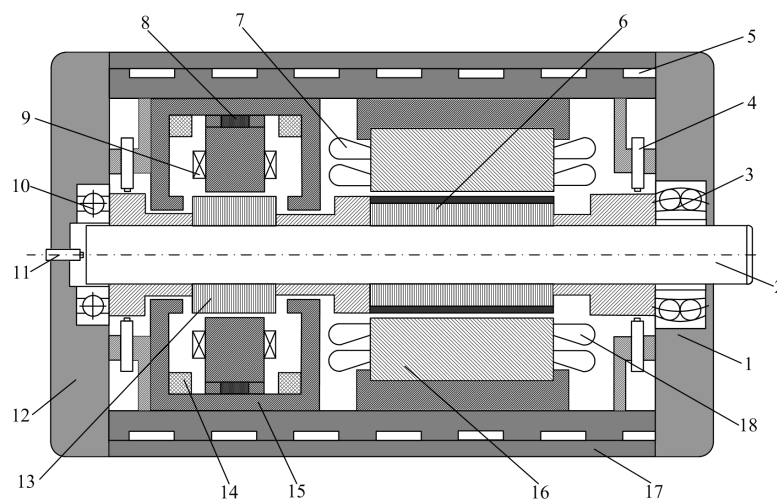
Schematic drawing of a test machine: 1-Front cover, 2-Shaft, 3-Radial-axial auxiliary bearing, 4-Radial displacement sensor, 5-Internal thread cooling pipe, 6-Permanent magnet rotor, 7-Suspension force winding overhang, 8-Permanent magnet, 9-Radial control windings, 10-Radial auxiliary bearing, 11-Axial displacement sensor, 12-Bake cover, 13-Rotor, 14-Axial control windings, 15-Axial stator lamination, 16-Stator lamination, 17-Aluminium housing, 18-Torque winding overhang.
